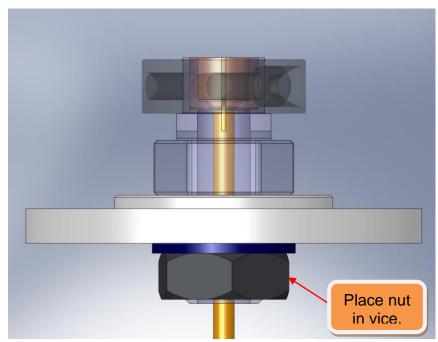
Seat the Flexure within the Flexure Mount, then apply a small amount of clamping force from the shaft collar.
